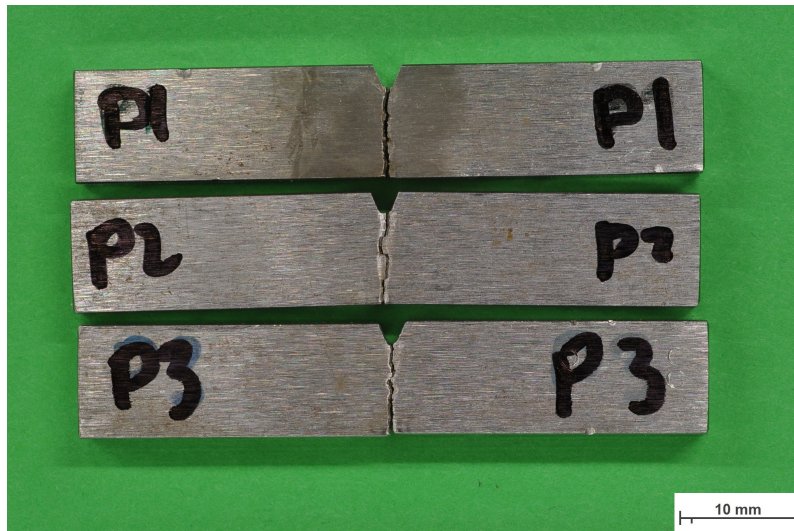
Butt weld EBLPWHT (P) Charpy V-notch samples after applying impact test at -20°C .
